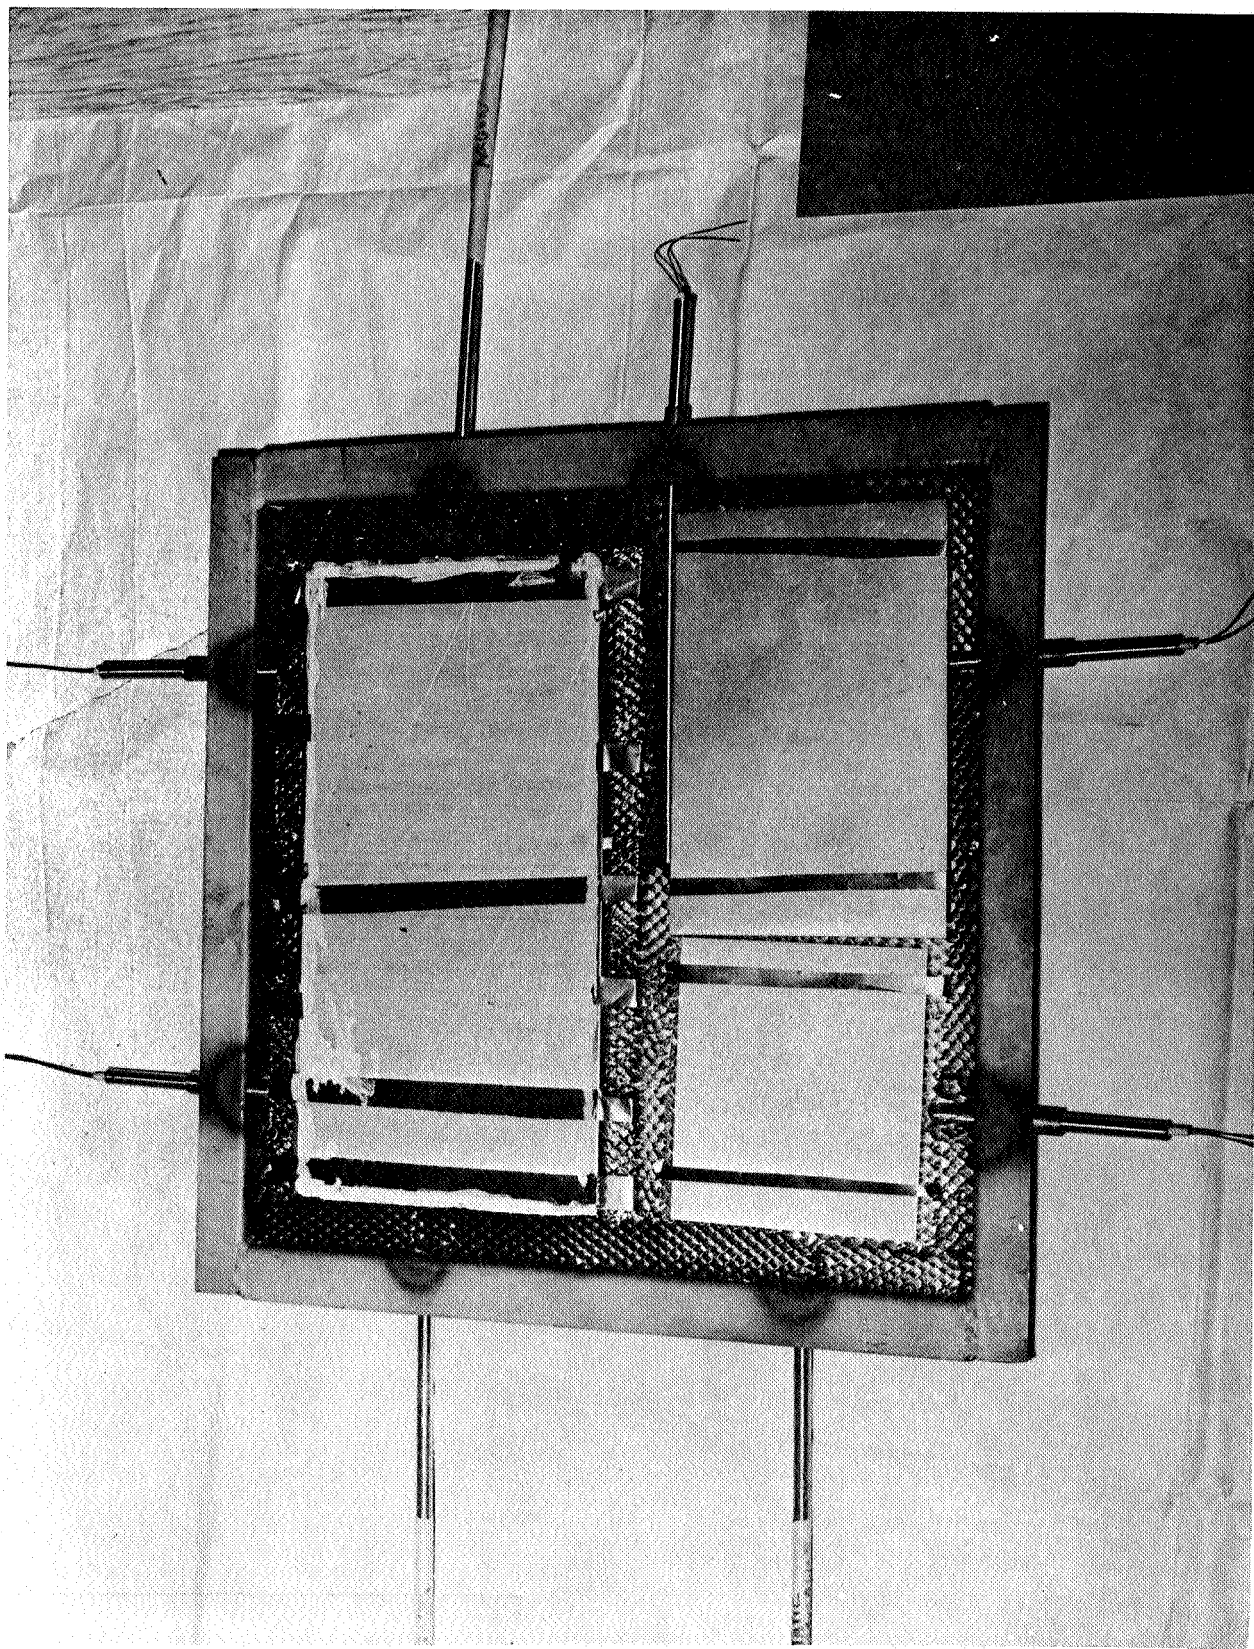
Lay-up of Detail Parts for Panel No. 1. The parts are surrounded by Stainless Steel Tooling Core and are within a Mild Steel Retort. Closed end Thermocouple Tubes and Gas Tubes are shown welded into the Retort Wall.
